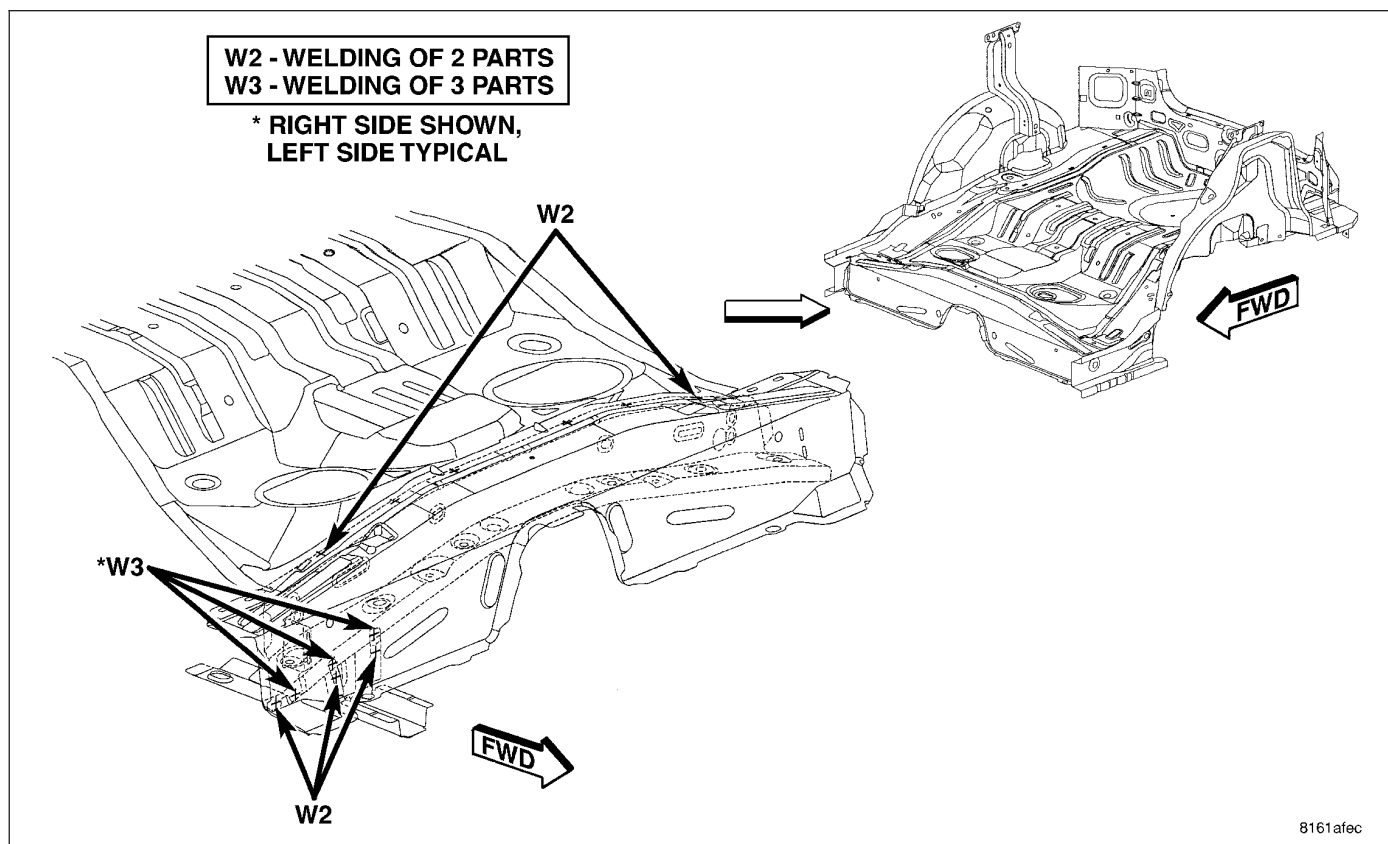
REAR FLOOR ASSEMBLY (11 OF 14)
